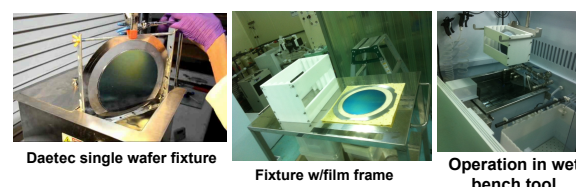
Testing de-bond with mounted device wafers on film frames occur on a single-frame and a Teflon® multi-frame fixture in a wet bench.
